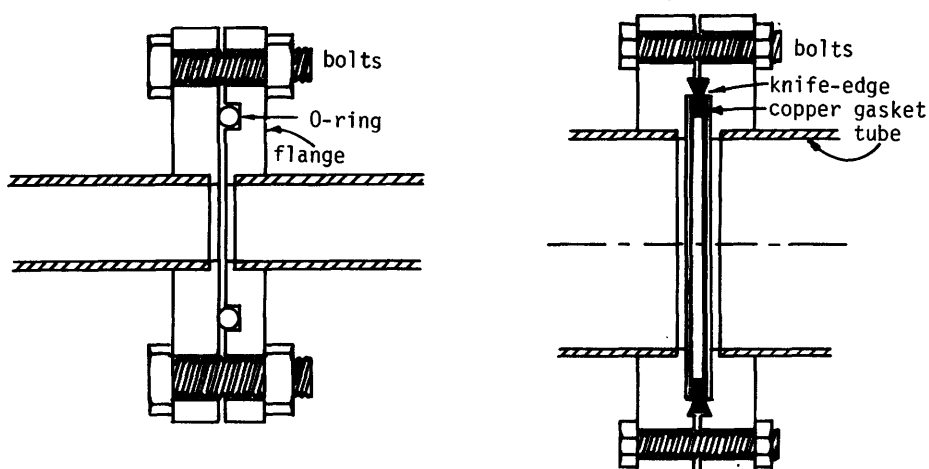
E5. Flange sealing techniques. An O-ring seal (left) and a bakeable metal seal (right).
